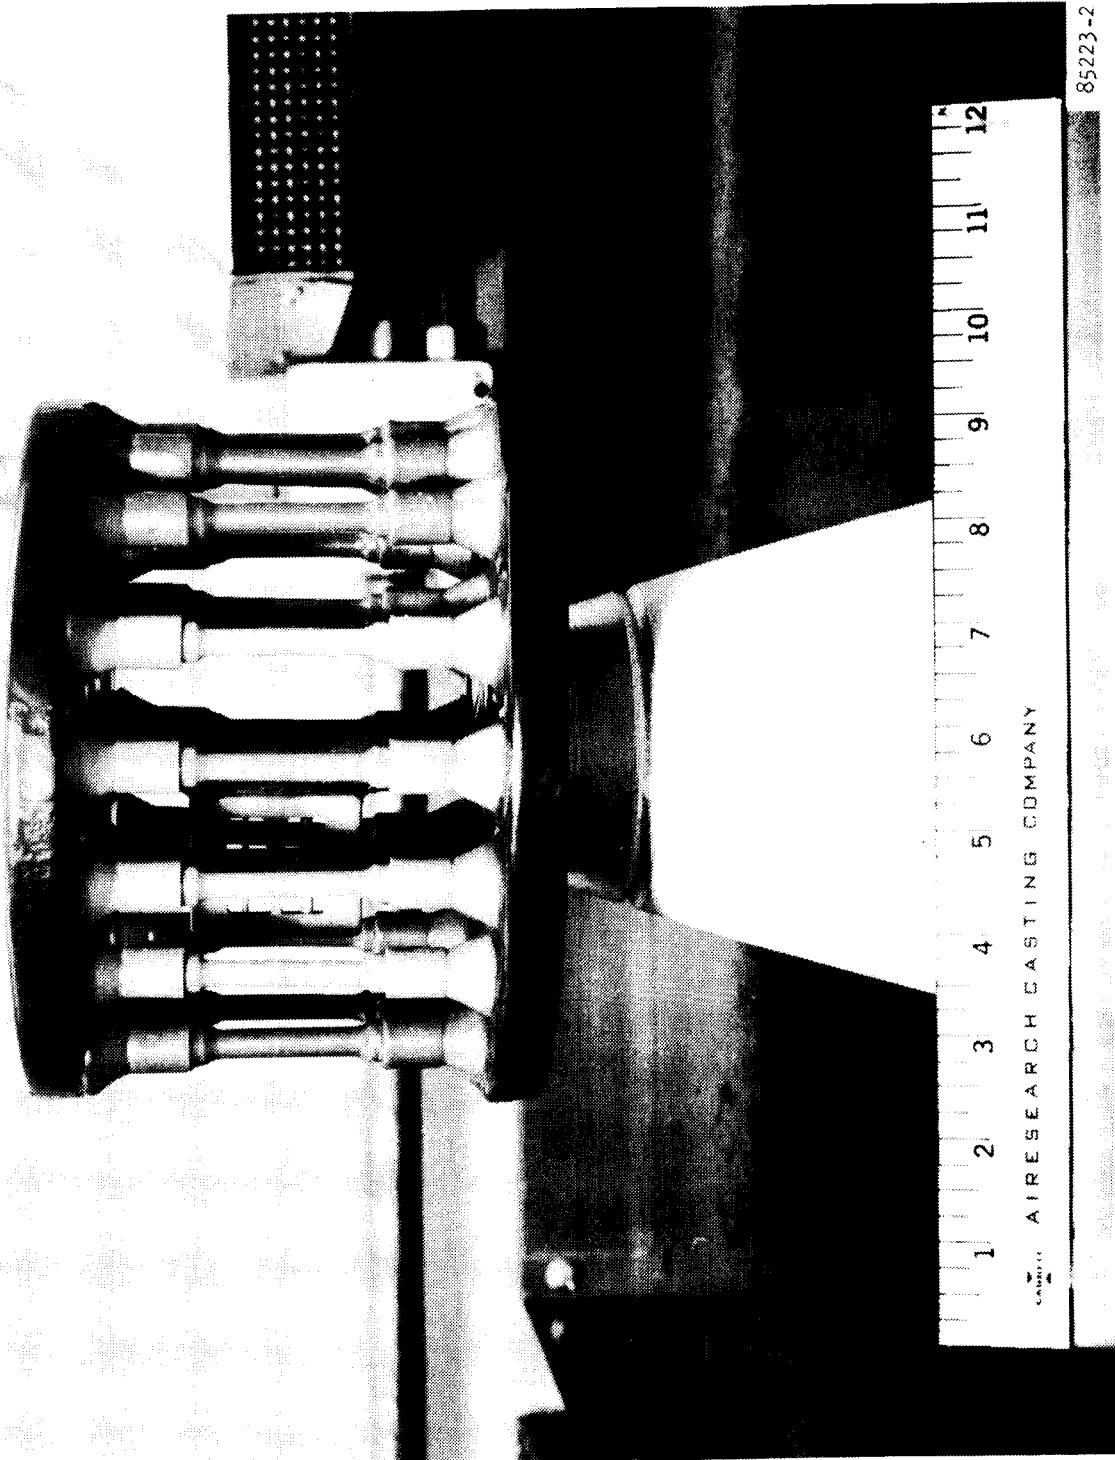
Wax Pattern Assembly Before Dipping to Form Mold.
